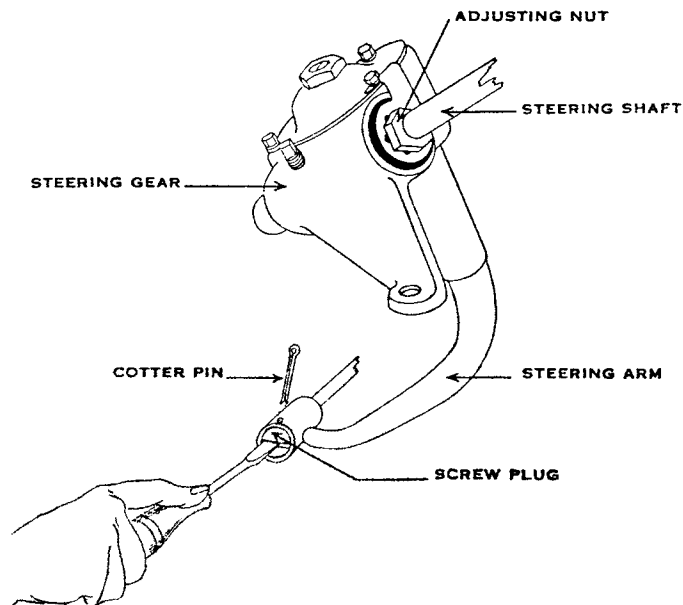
Taking Lost Motion from Steering Connecting Rod (Cross Rod Type)
